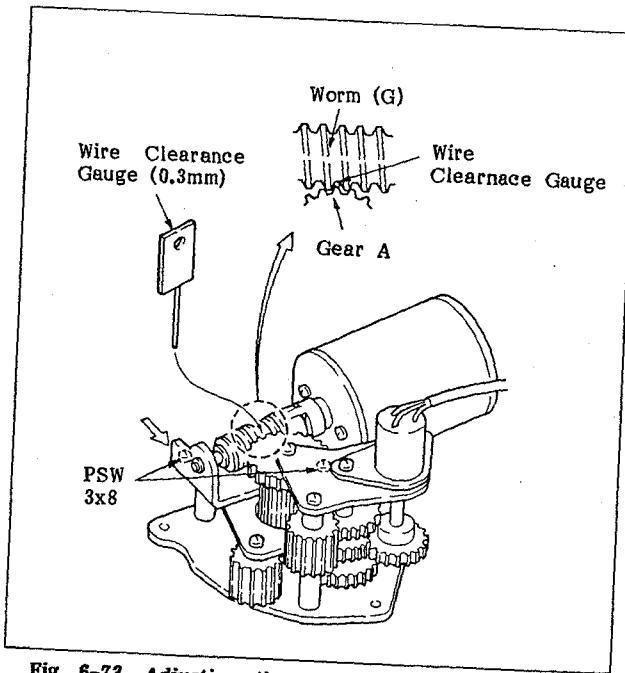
Adjusting the Position of the Threading Motor Assembly
